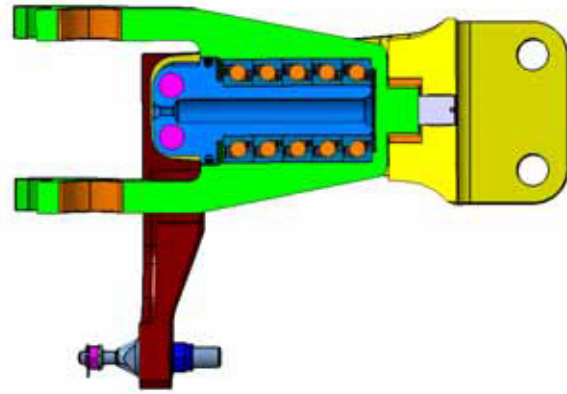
Bearing arrangement of the feathering hinge on Hornet helicopter
